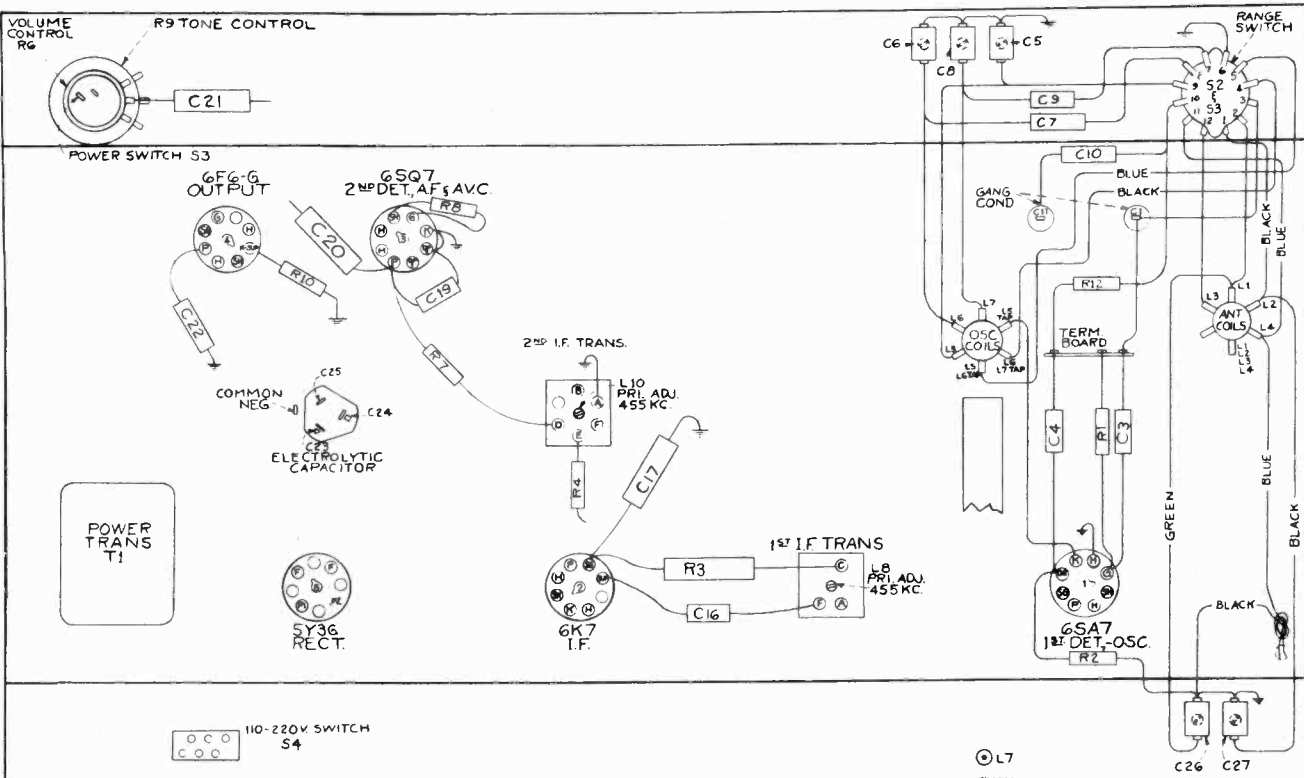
TUBE, TRIMMER AND PARTS LOCATION—BOTTOM VIEW
